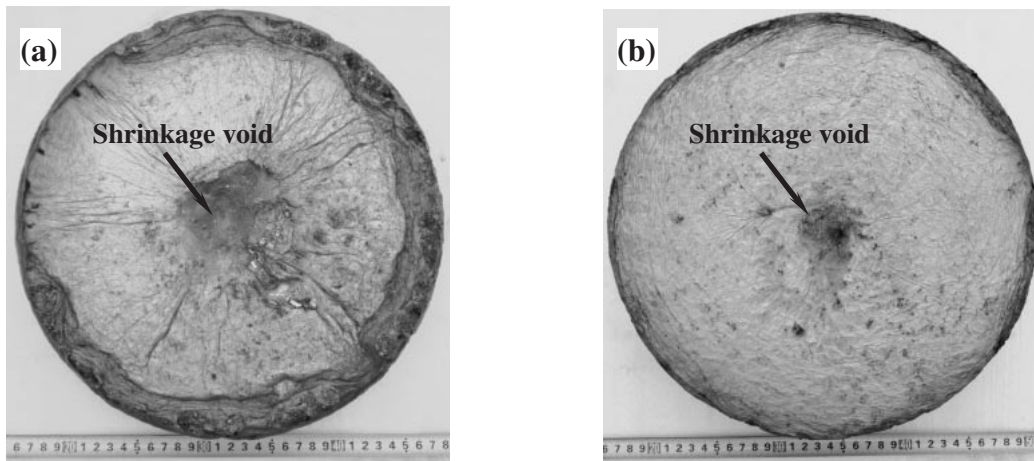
Terminal billets of AZ80 alloys under different casting conditions (a) Conventional casting (b) Electromagnetic vibration casting.
